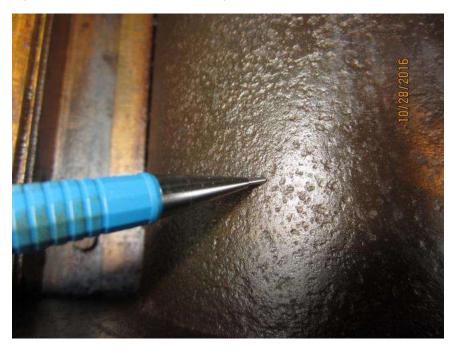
Southwest rack pinion bearing. Note the corrosion and heavy pitting on the journal.
